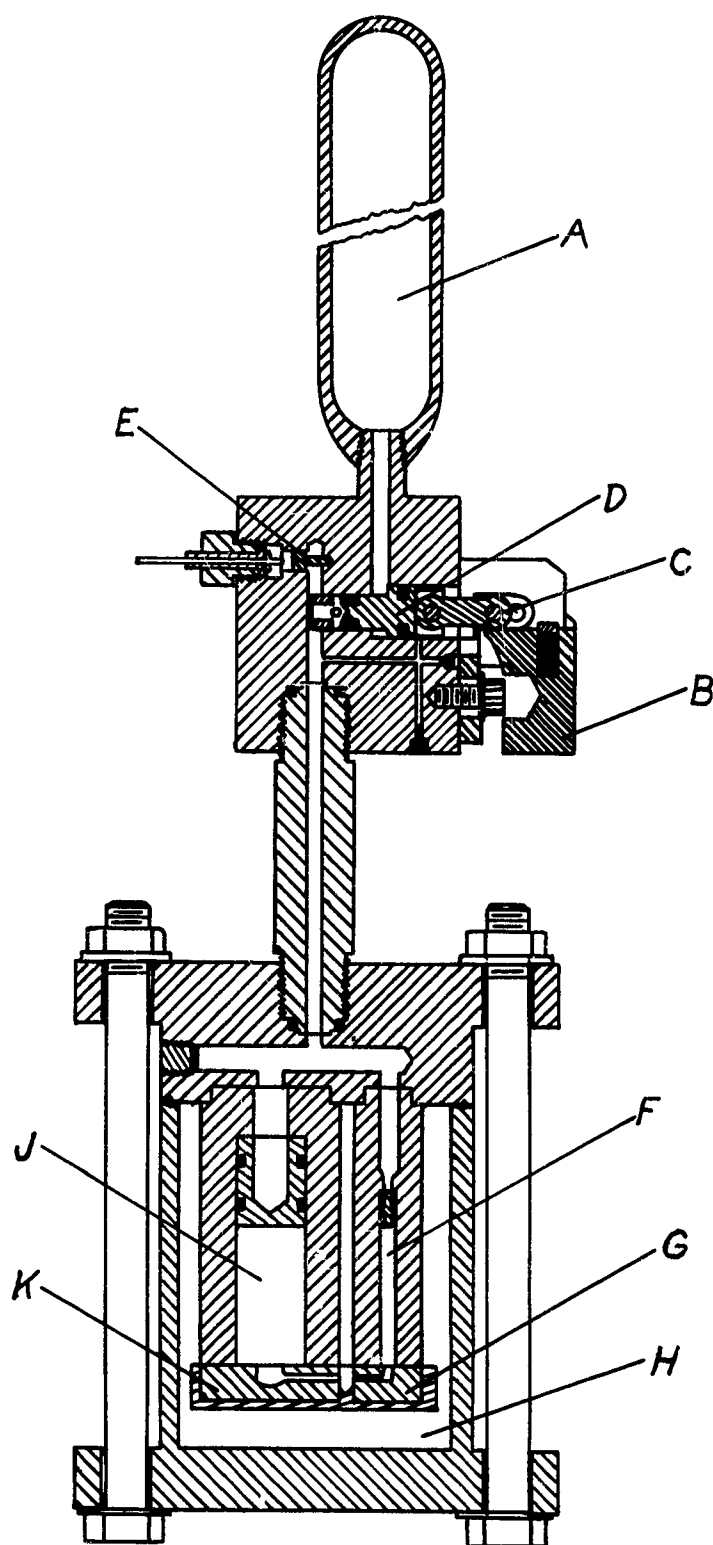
Cross-sectional Assembly Drawing of Pneumatic Injector and Bomb Reactor I.
